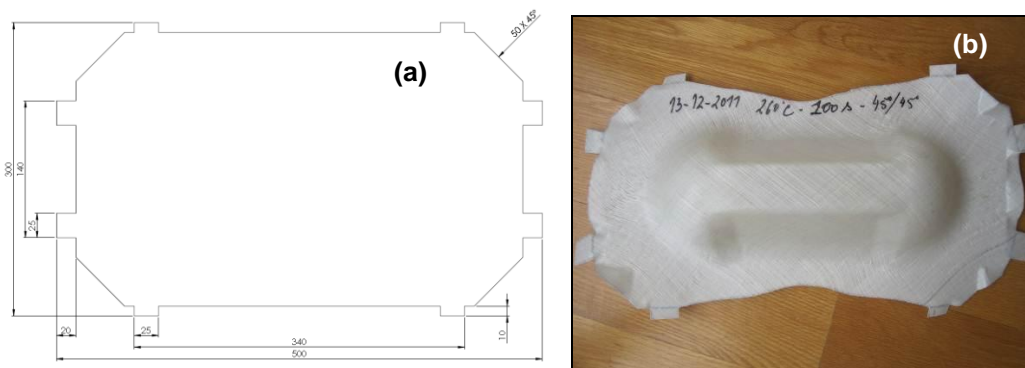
(a) Dimensions of blank use in forming experiments (in mm). (b) Formed part using final perimeter shape, the tabs used to hold the sheet using the clips are clearly visible.
